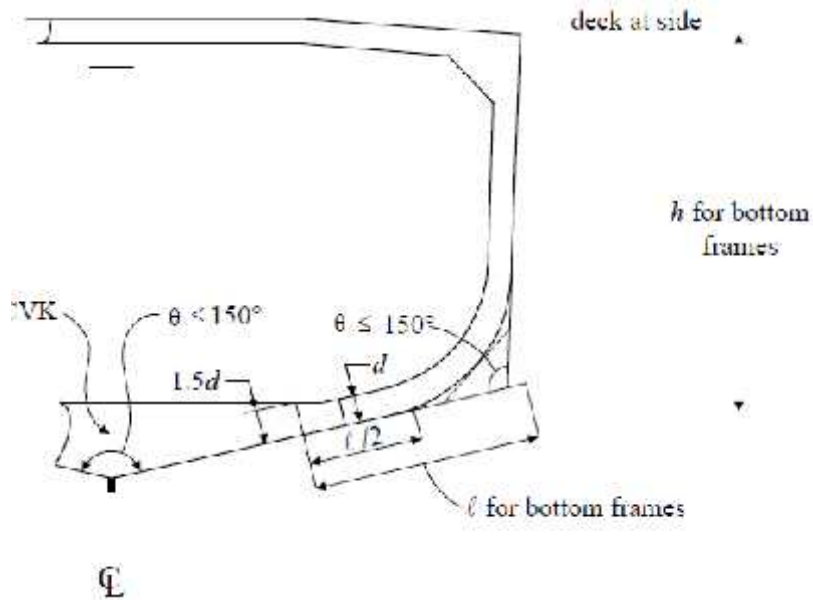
Transverse Bottom Frames with Longitudinal Side Girders
